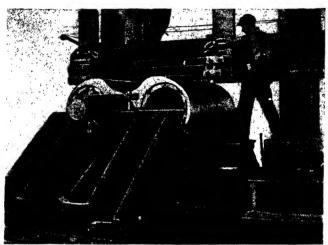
Planing formed lobes of a large impeller for a rotary pump.
